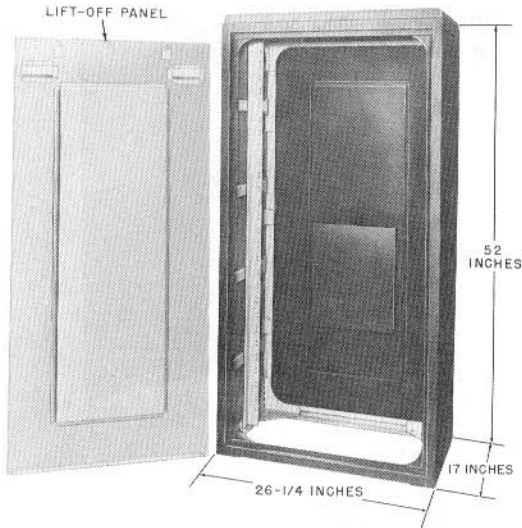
26-Plate Apparatus Cabinet per ED-92185-70
